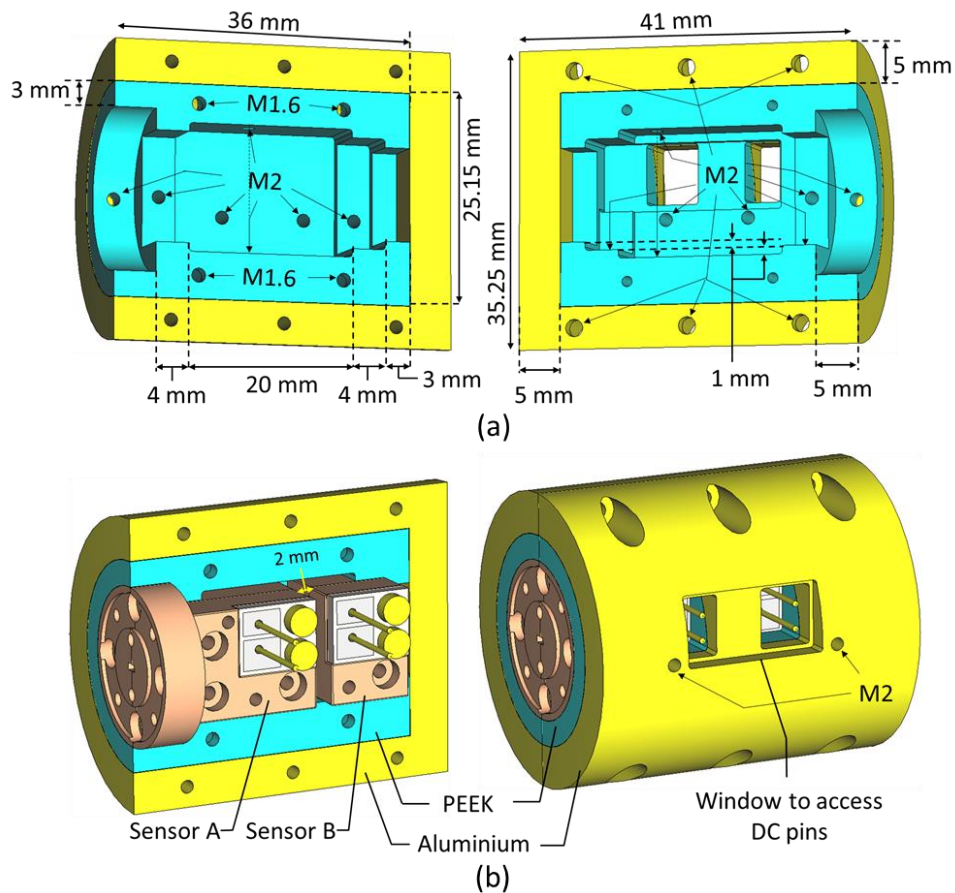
Design of (a) inner and outer shielding, (b) Sensor A and Sensor B assembled in shielding.
